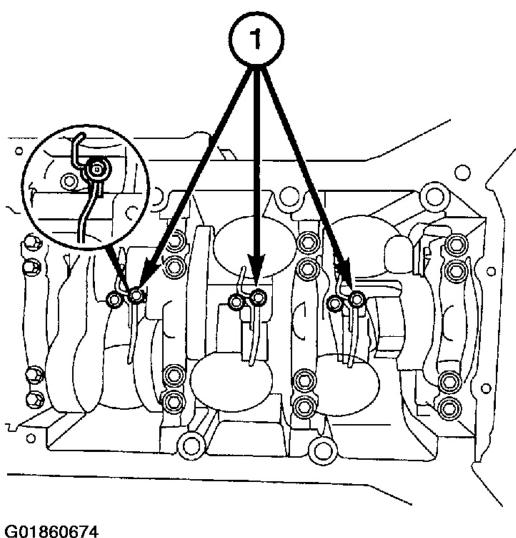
Removing Oil Spray Nozzle Bolts & Nozzles Courtesy of DAIMLERCHRYSLER CORP.
